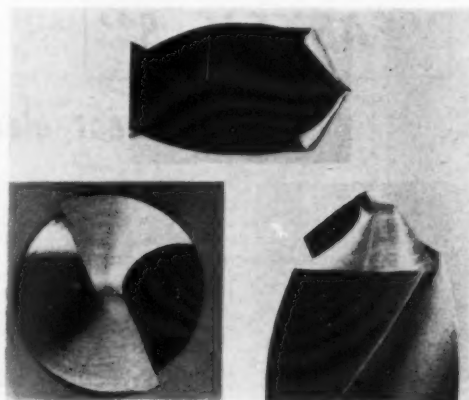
Three views of a drill sharpened in a Spiropoint machine
